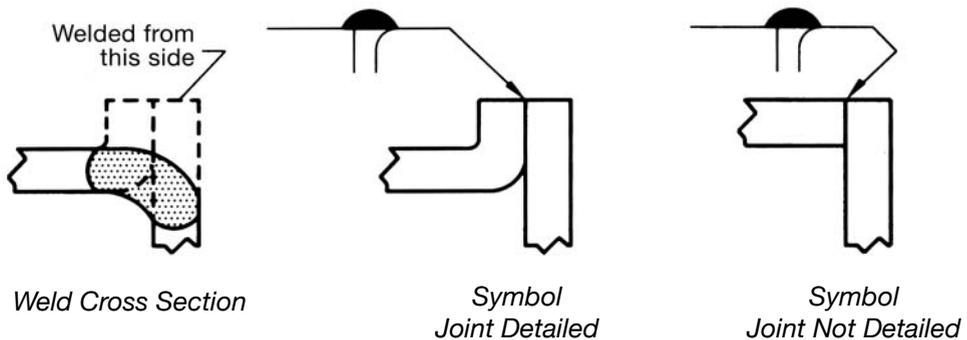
Weld Joint Designs (continued)
